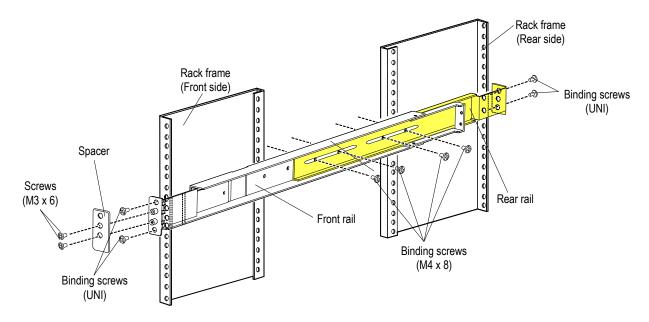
Installing the Rail (Sun StorEdge rack frame)
